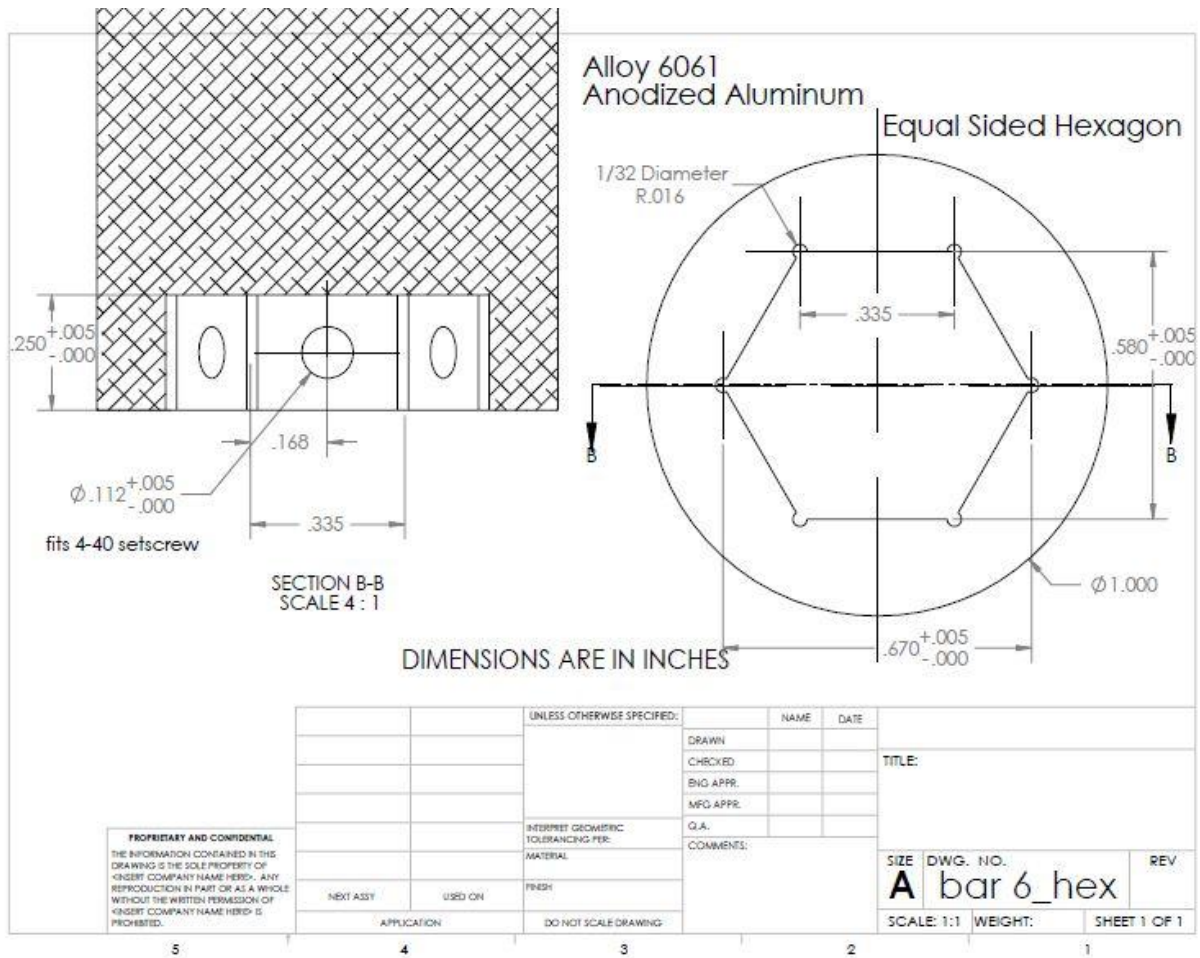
Hexagonal Socket Dimensions with 6 hole configuration
